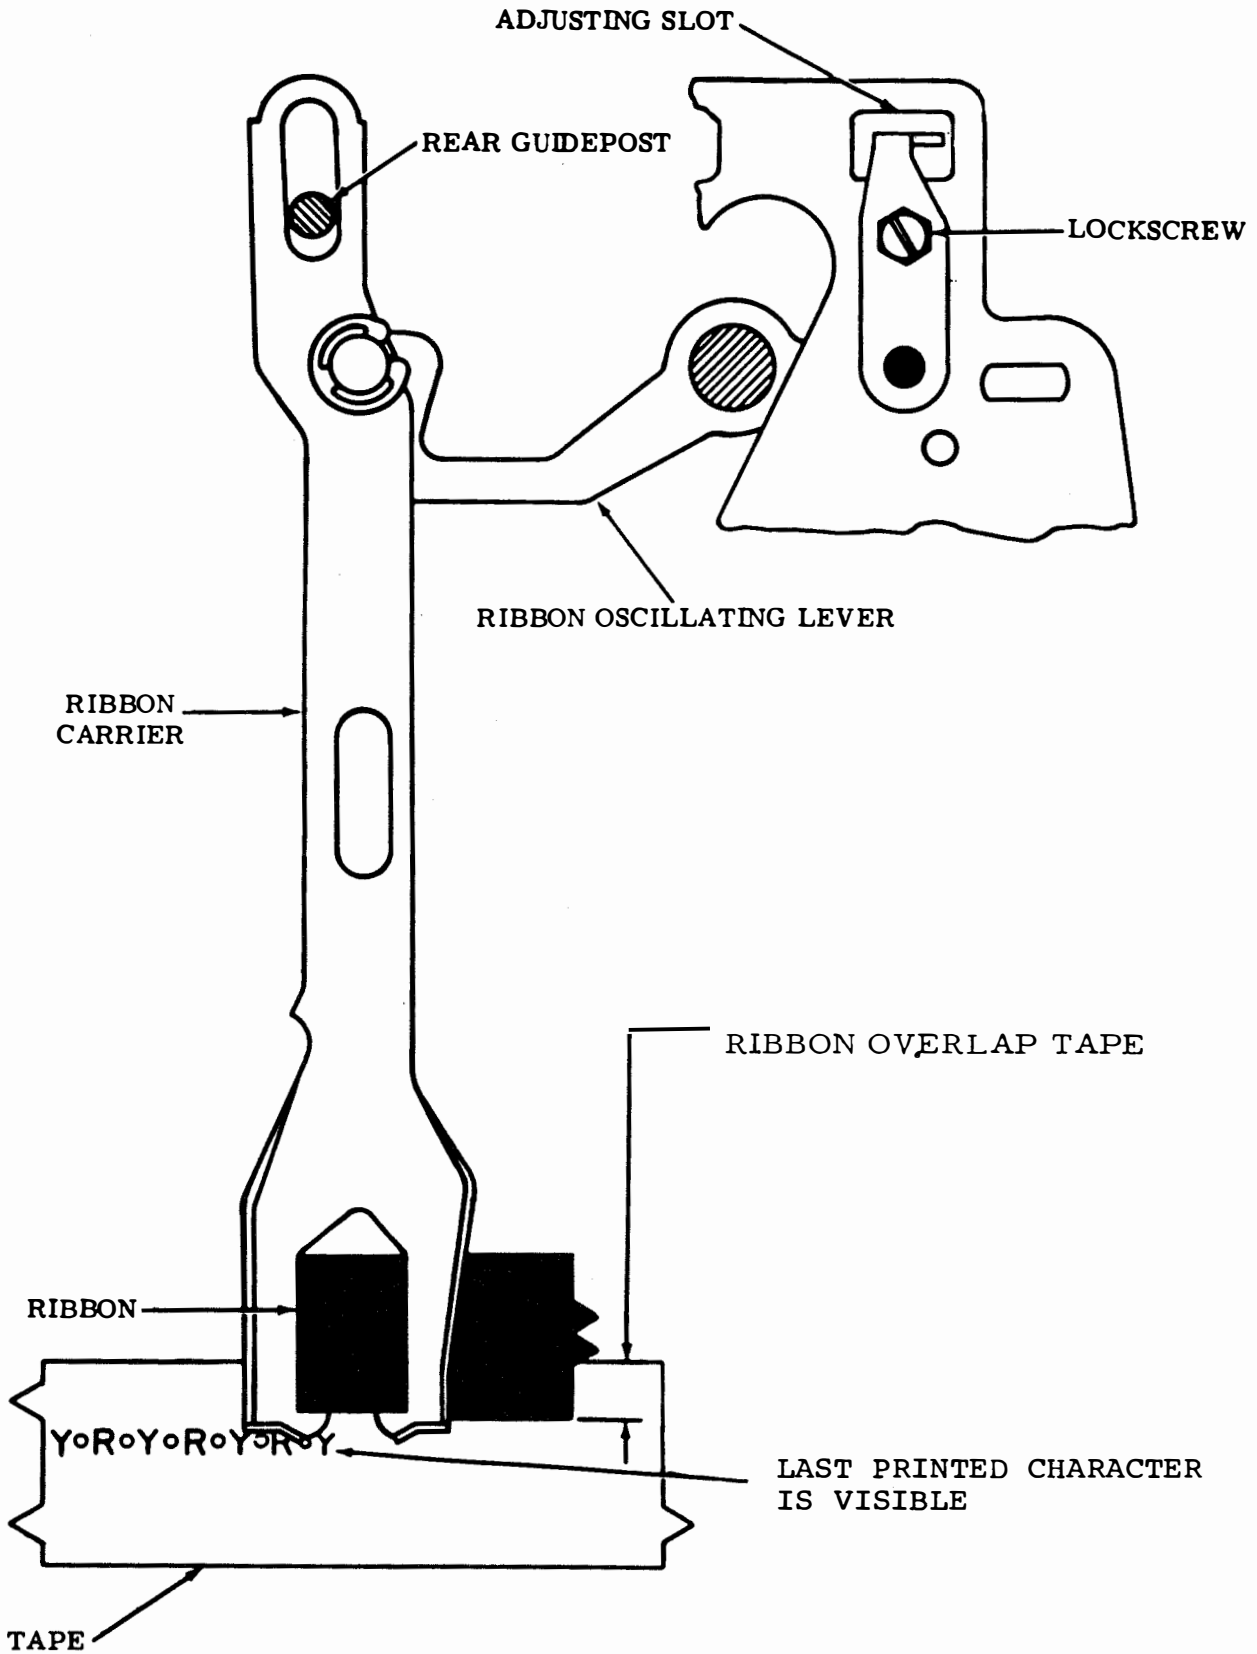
Ribbon Carrier (For Fully Perforated Tape), Top View
